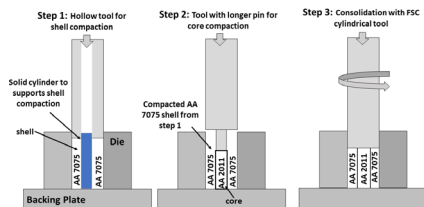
Method 2 schematic presentation for fabricating of shell-core multi-material billet
